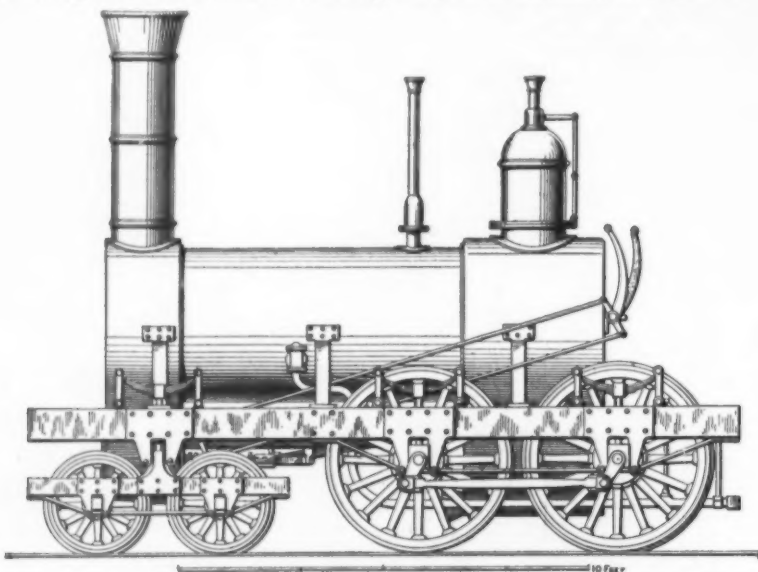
CAMPBELL'S FIRST AMERICAN EIGHT WHEEL ENGINE, 1836—PHILADELPHIA, GERMANTOWN, AND NORRISTOWN RAILROAD.
